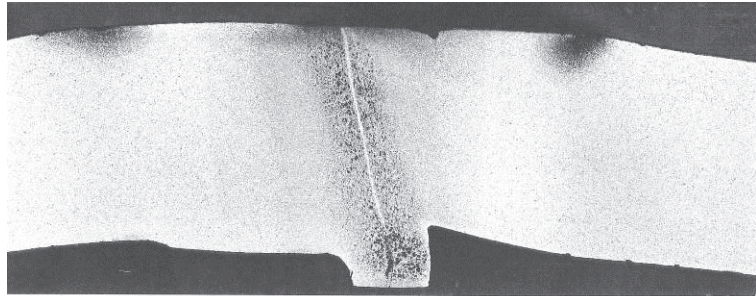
Direct Current Welded Seam with Offset Skelp Edges
